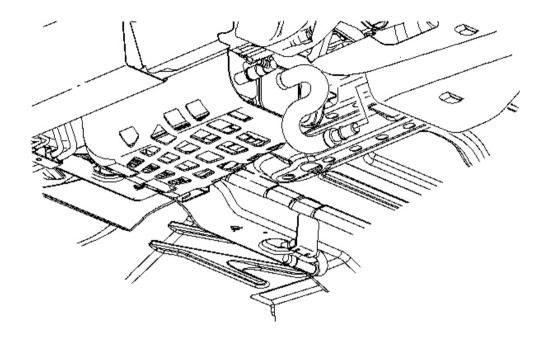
View Of EVAP Canister Fresh Air Line Courtesy of GENERAL MOTORS CORP.
